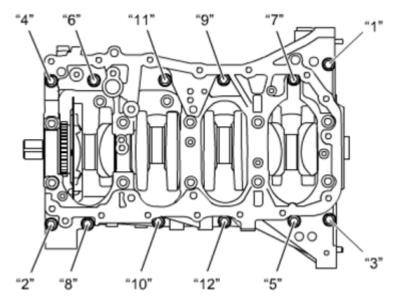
Identifying Crankcase Bolt Courtesy of SUZUKI OF AMERICA CORP.
